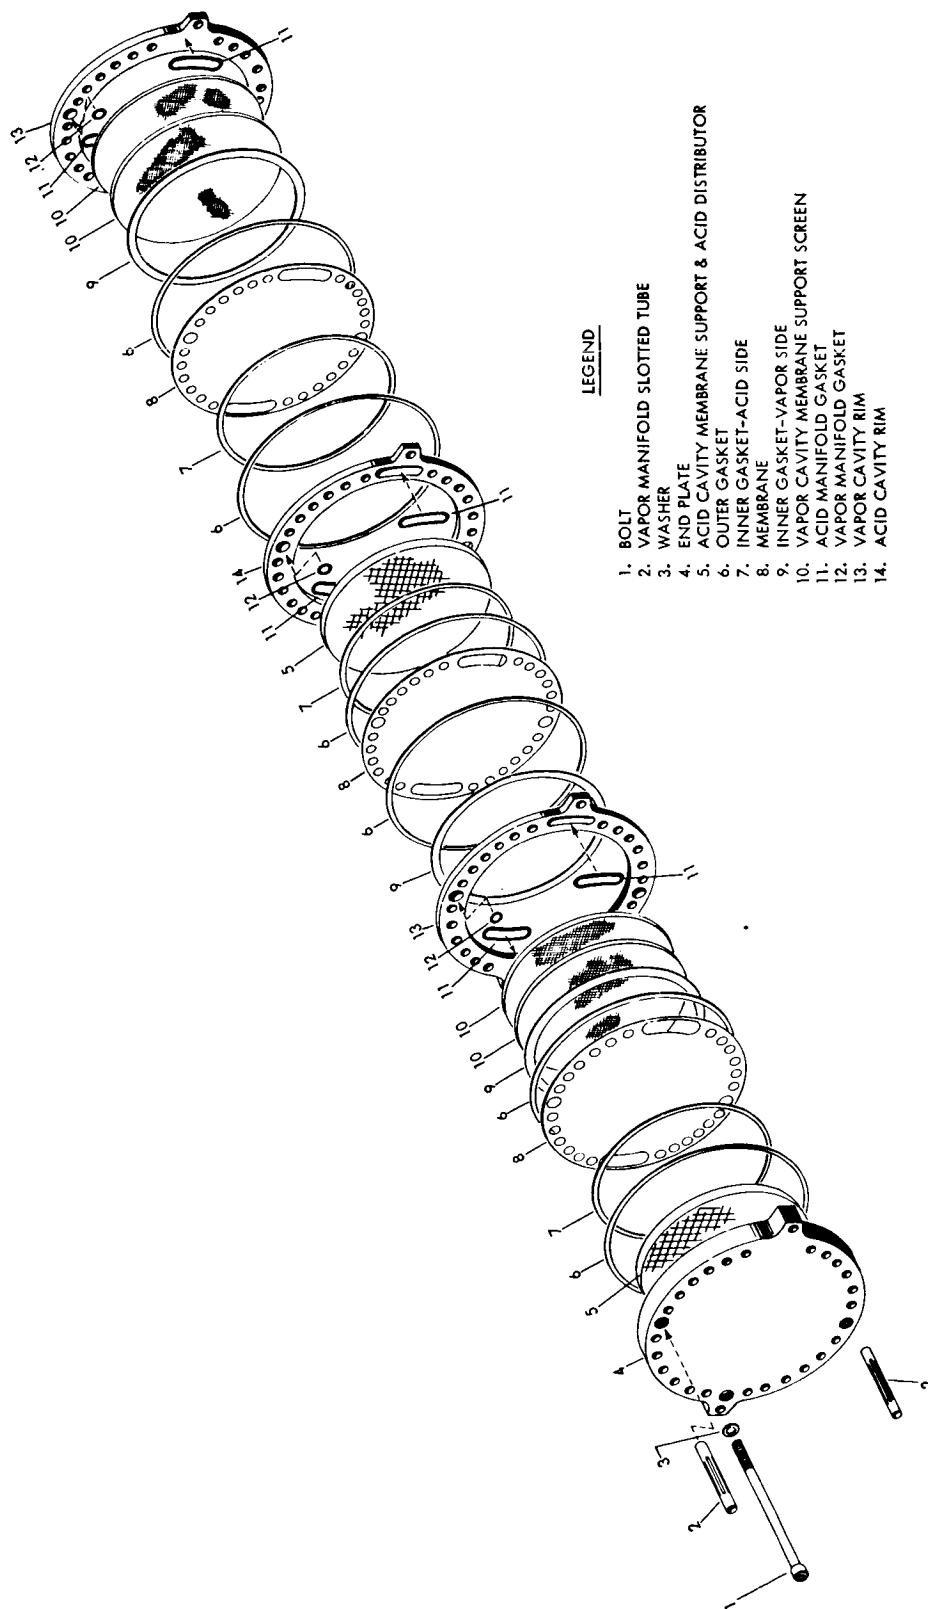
EXPLODED VIEW OF "2KW OSMOTIC STILL"
